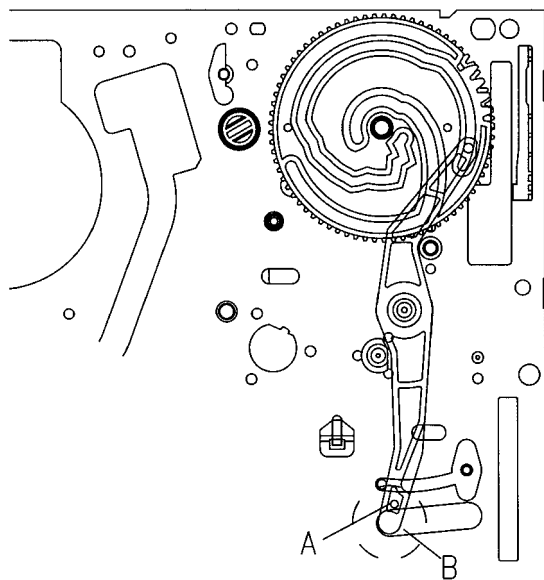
Mechanical Checks/Relay Lever and Cam Gear Alignment
